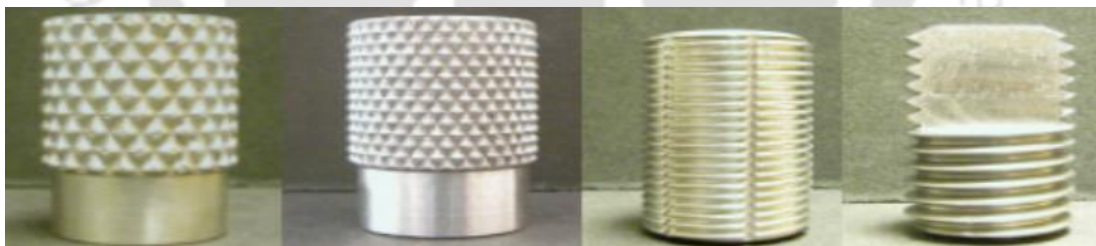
Example of some of the mandrel surfaces. Left to right: coarse knurl, fine knurl, fine screw thread with axial grooves, and coarse screw thread [58]
